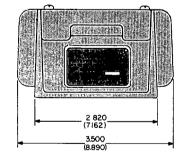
KA 39 VOLTAGE CONVERTER OUTLINE AND MOUNTING DRAWING
